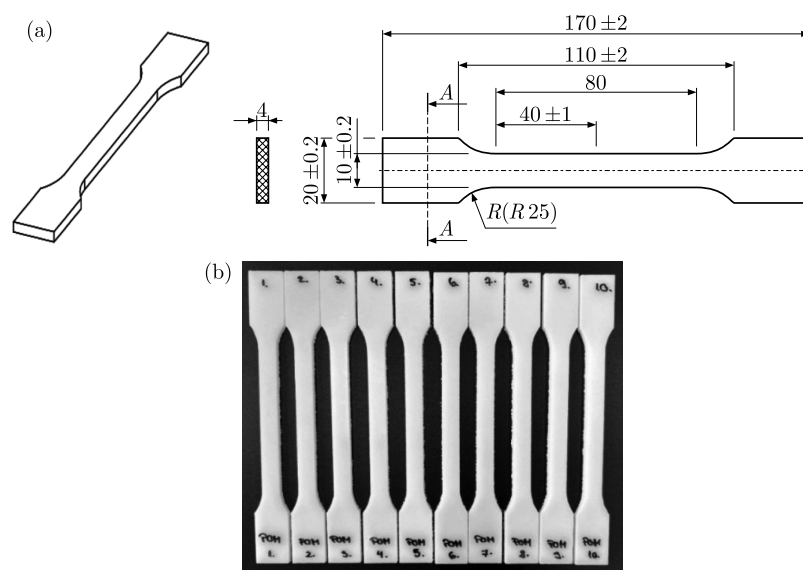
(a) Specimen dimensions (in mm); (b) specimens made of POM before testing.
